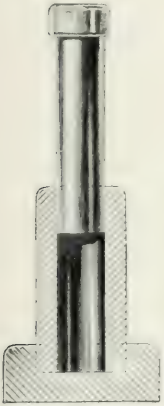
SECTION OF IRON MOULD WITH PISTON USED FOR COM-PRESSING ICE.
